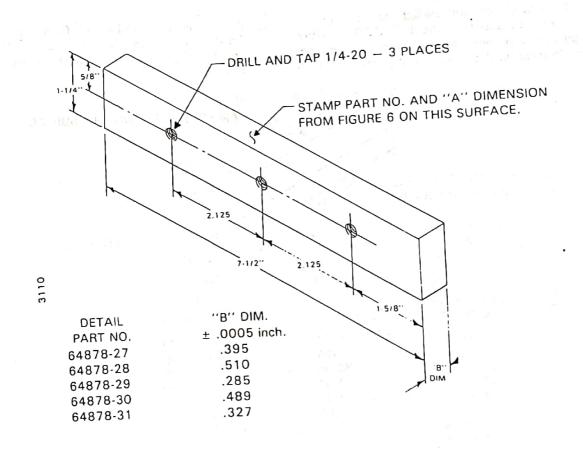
Dimensions of New Spacers for P/N 64878 Fixture
